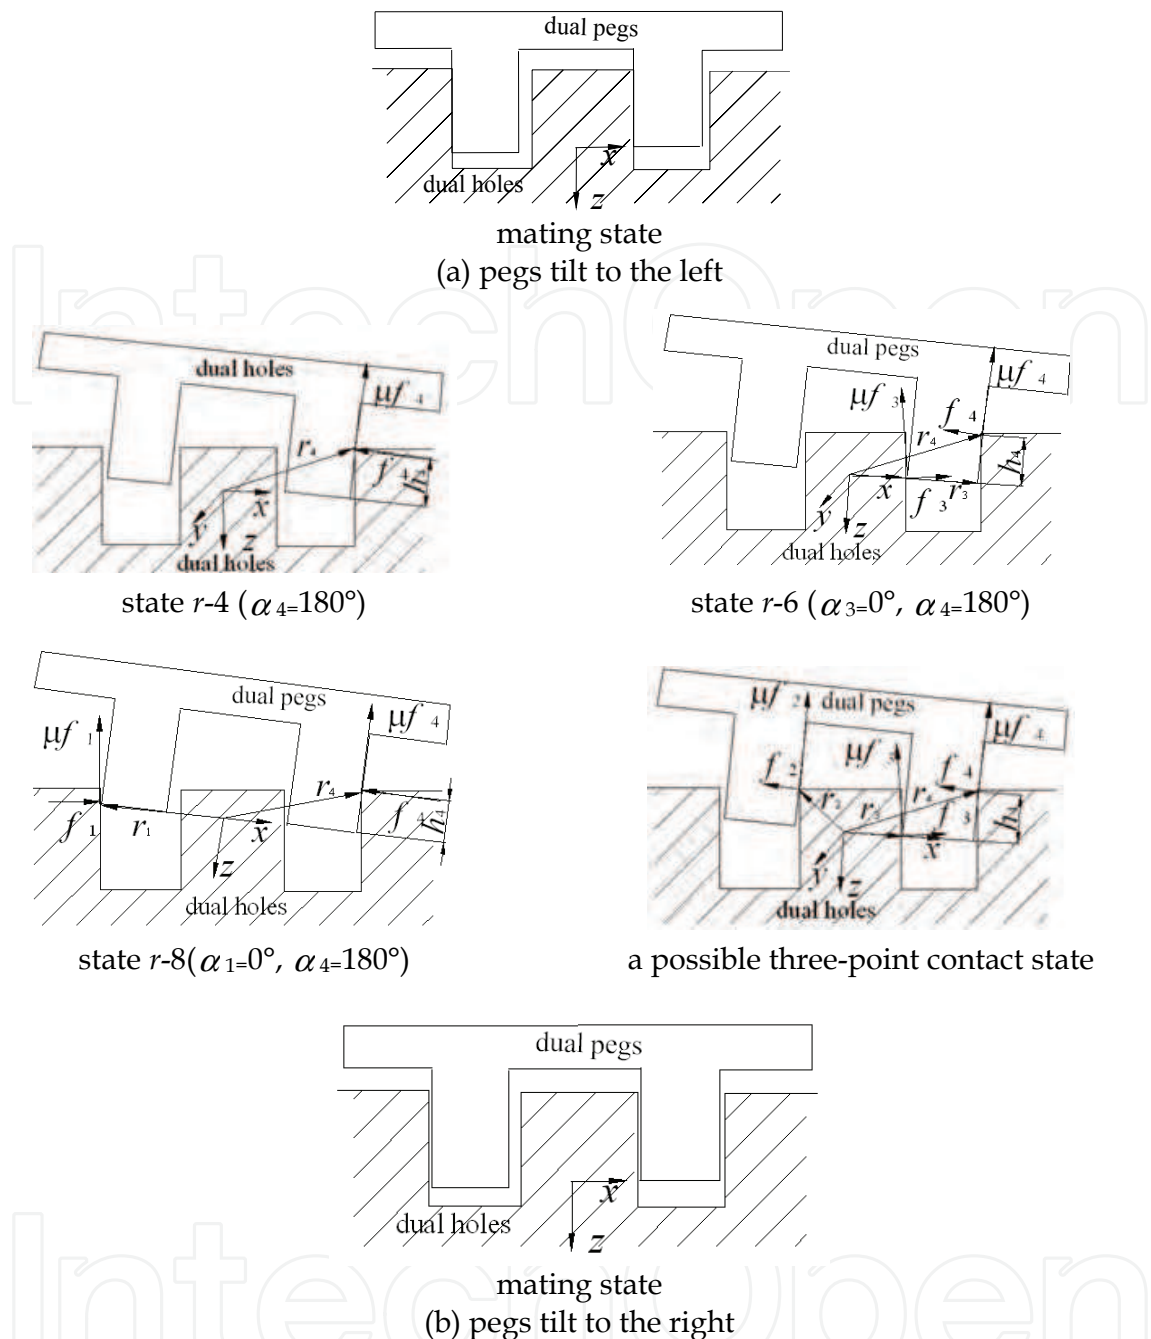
Assembly states of a dual peg-in-hole in two dimensions.
